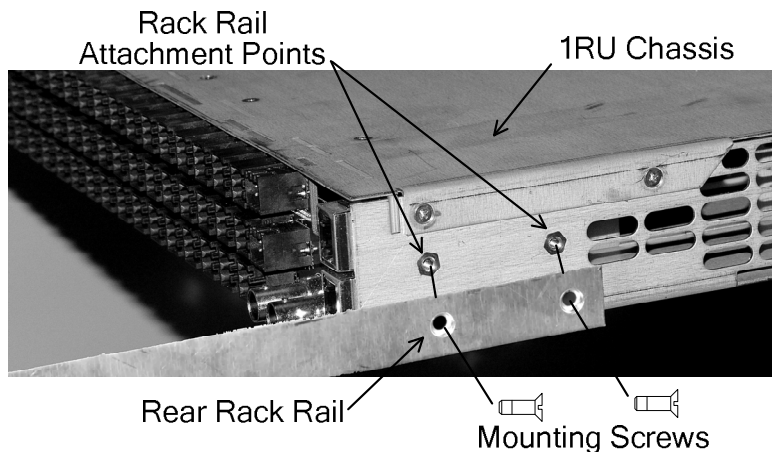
Rear Rack Rail Mounting – Typical 1 RU Chassis Installation
